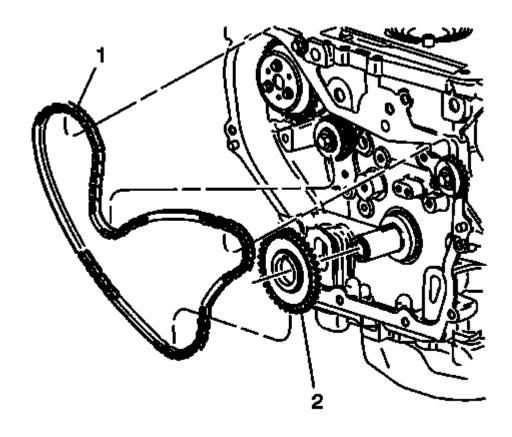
Balance Shaft Drive Chain And Sprocket Courtesy of GENERAL MOTORS COMPANY
